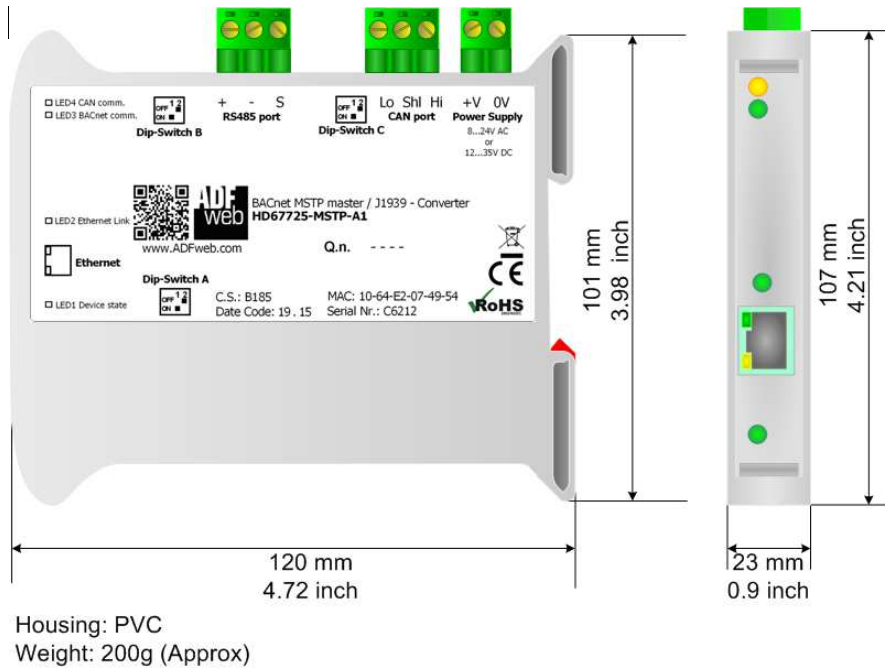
Mechanical dimensions scheme for HD67725-MSTP-A1
